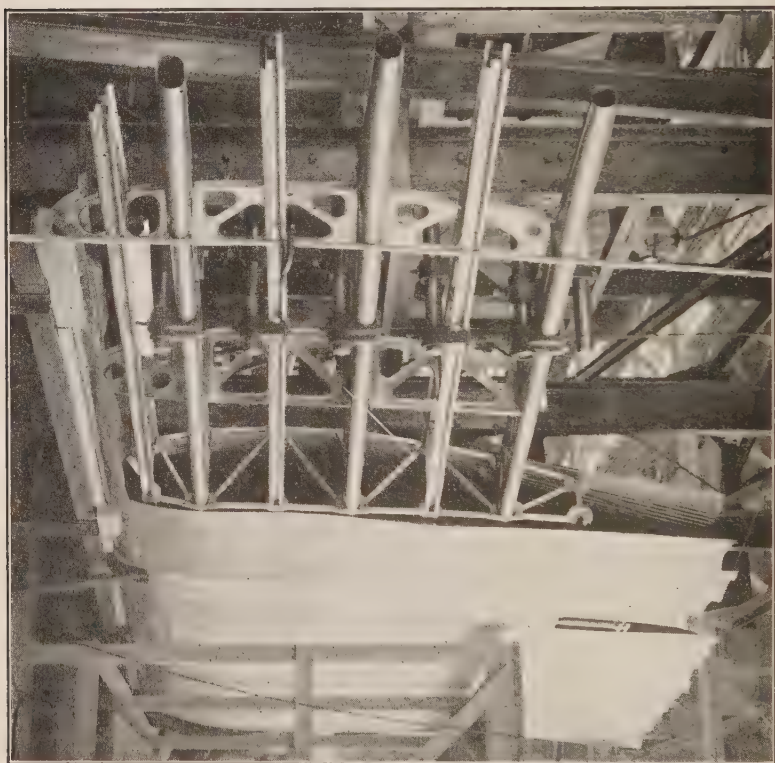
Construction of metal wing with sheet duralumin covering. (*Courtesy Ford Motor Co.*)
